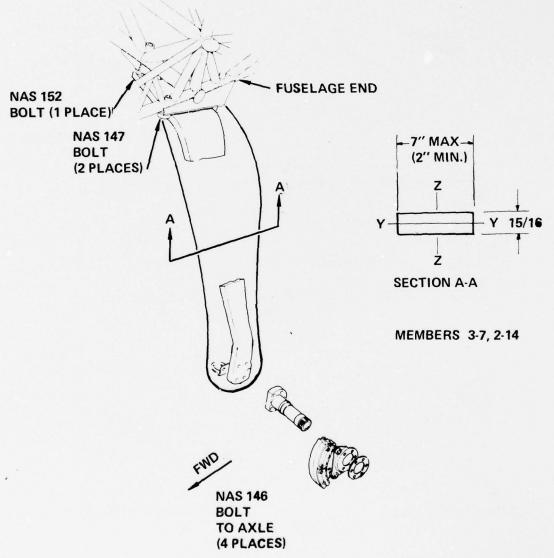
Main Landing Gear Structure Cantilever Spring Cross Section
